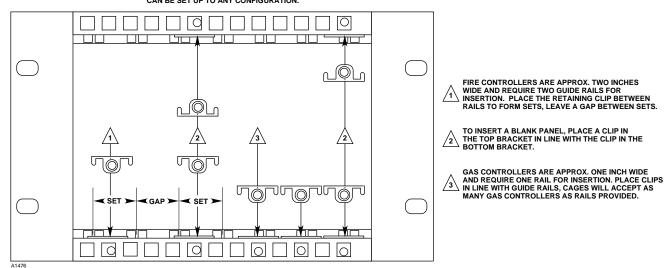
Clip Positioning for Q4003 and Q4004 Mounting Racks
